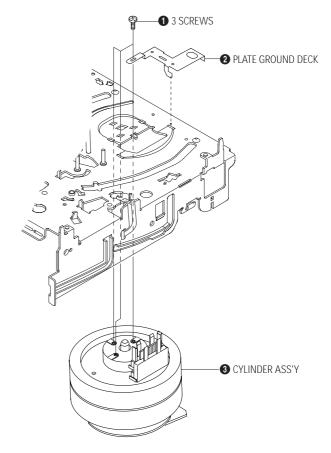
Plate Ground Deck, Cylinder Ass'y Removal
